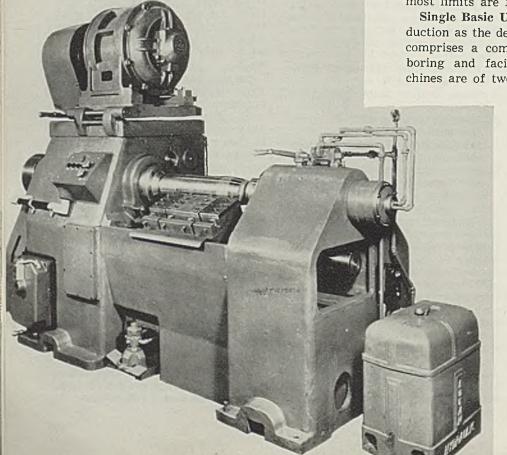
Front view of "emergency" shell lathe of 6-inch type, as designed by National Machine Tool Builders' Association on behalf of United States Ordnance Department. This line of machines, designed specifically for machining shell of particular caliber groups (3 or 6-inch as the case may be) have capabilities of their automatic cycle, speeds, feeds and work-and-tool holding facilities limited in scope to the single purpose for which the machines are built. Efficient though they are on shell, they intentionally are impractical —if not wholly useless—for any other manufacturing purposes. Machine shown is tooled for turning operations only, the oscillating facing and cuttingoff tool holders not being used in this particular case
